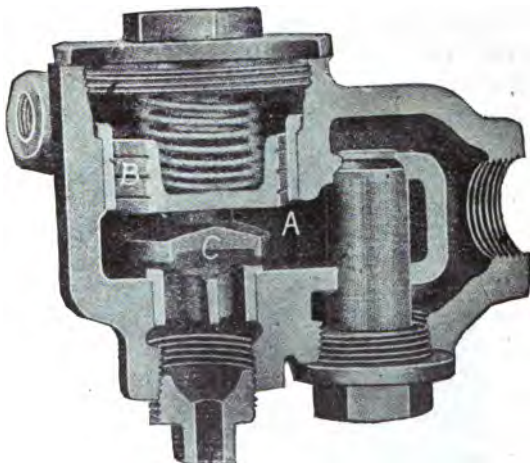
Main Valve. Emergency Air Brake Attachment.
